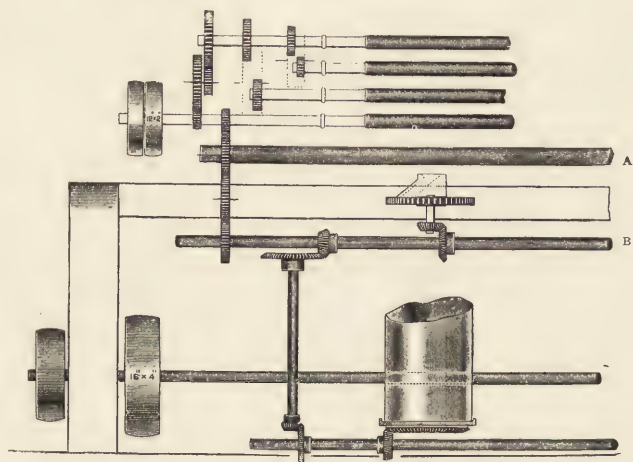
SECTION OF GEARING OF DRAWING FRAME WITH PLAN OF ROLLERS.
